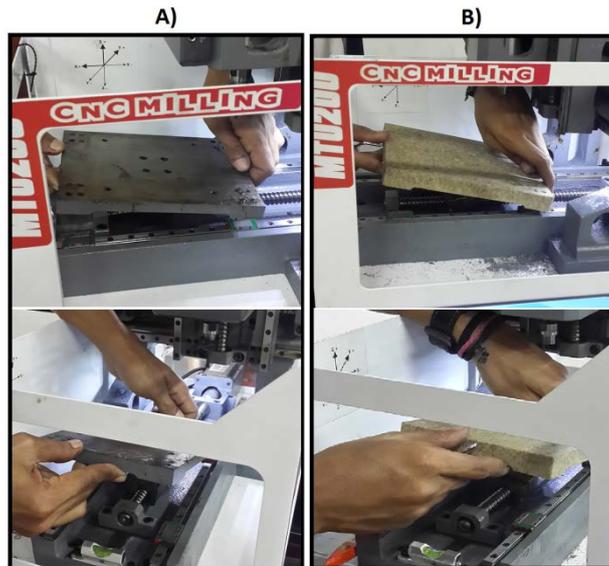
Removal and installation of CNC milling moving part (table unit) A) cast iron ASTM 40 material. B) EFB fiber filled epoxy material.
